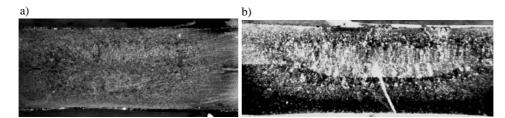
Macrostructure of welded joints: a) standard RSW, b) DeltaSpot RSW
